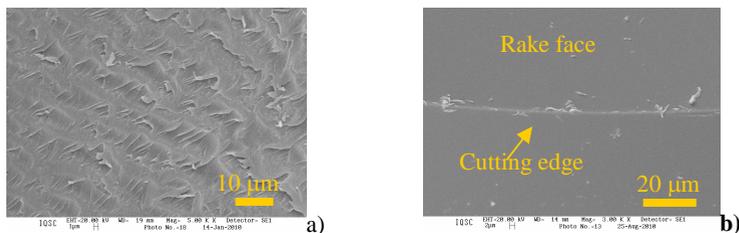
a) Uncut shoulder b) cutting edge after machining tests.
